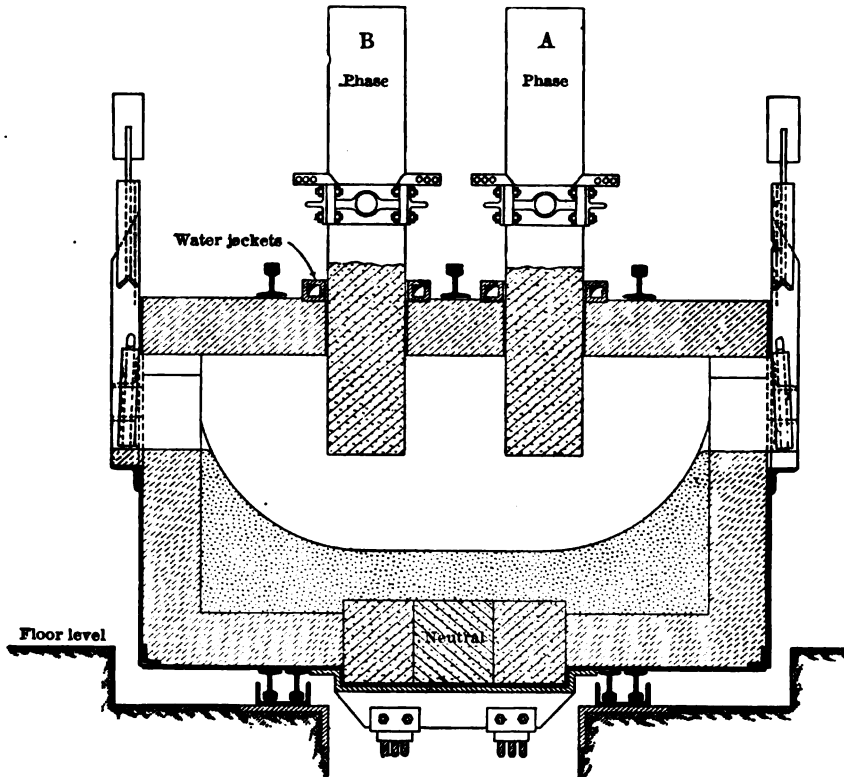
Longitudinal elevation of 2.5-ton, two-phase Grünwall steel furnace, Sheffield, England.
